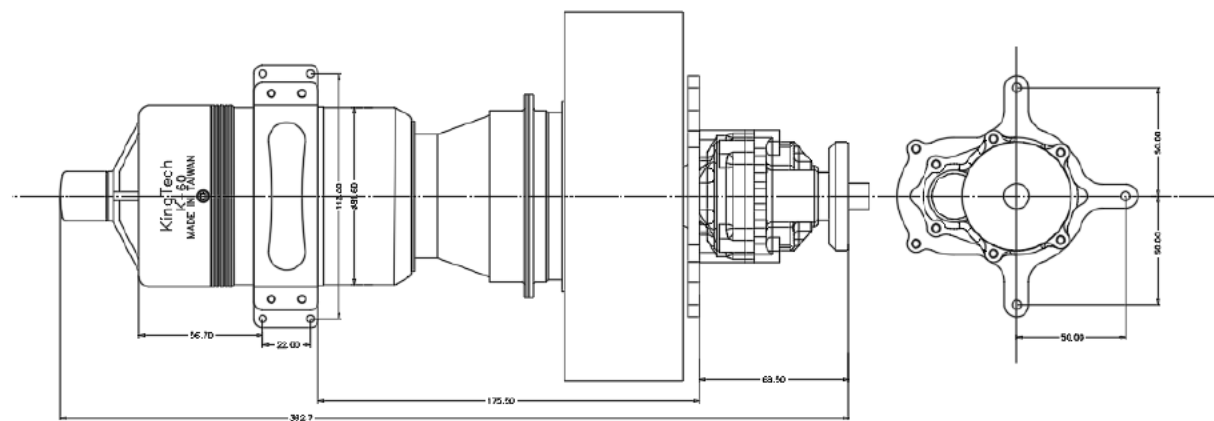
K60TPG4 physical dimensions (KingTech 2023)
